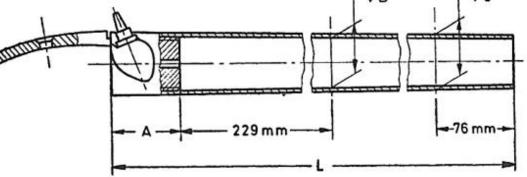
DIMENSIONS FOR BARREL FOR MUZZLE LOADING SHOT GUN
